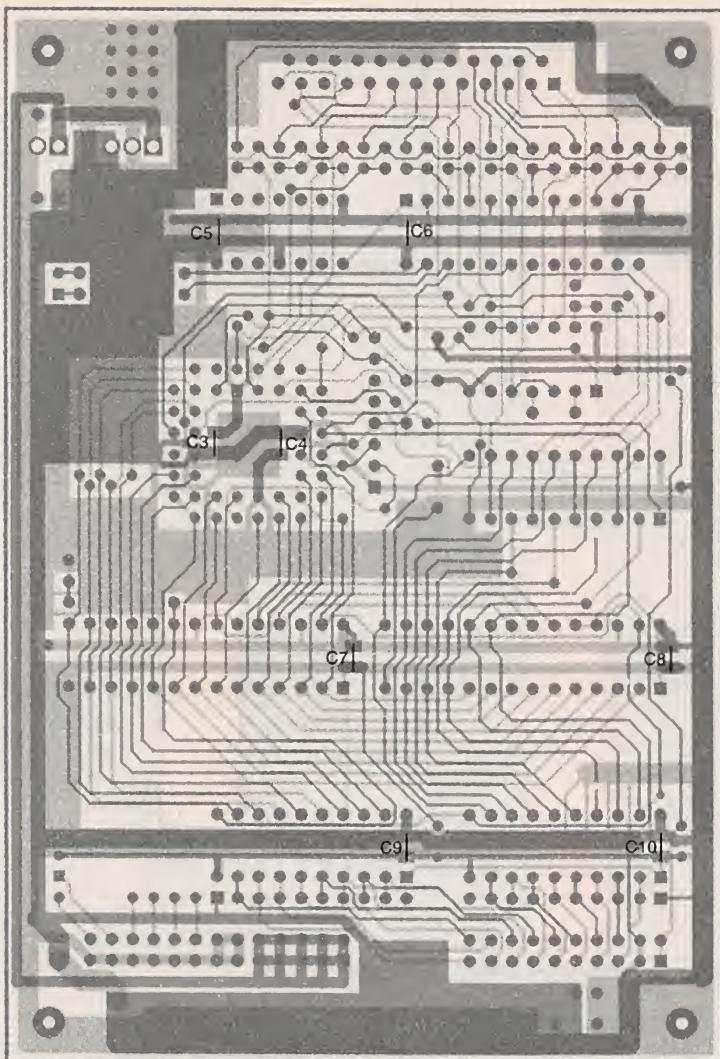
The solder side of the logic analyzer board has a handful of surface-mount capacitors attached to it. Those components should be mounted before the through-hole components.
